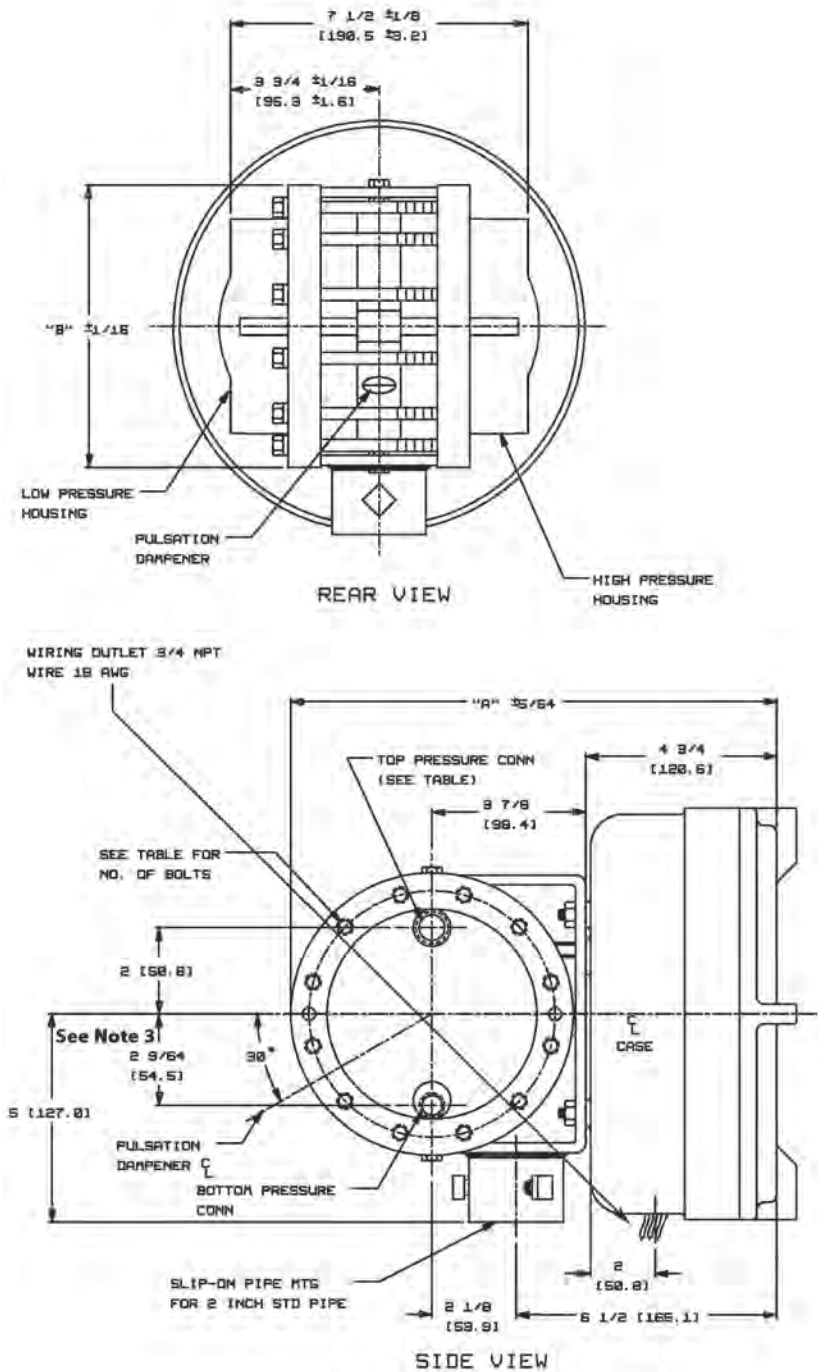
Model 291B Outside Dimensions (Part 1 of 2)
